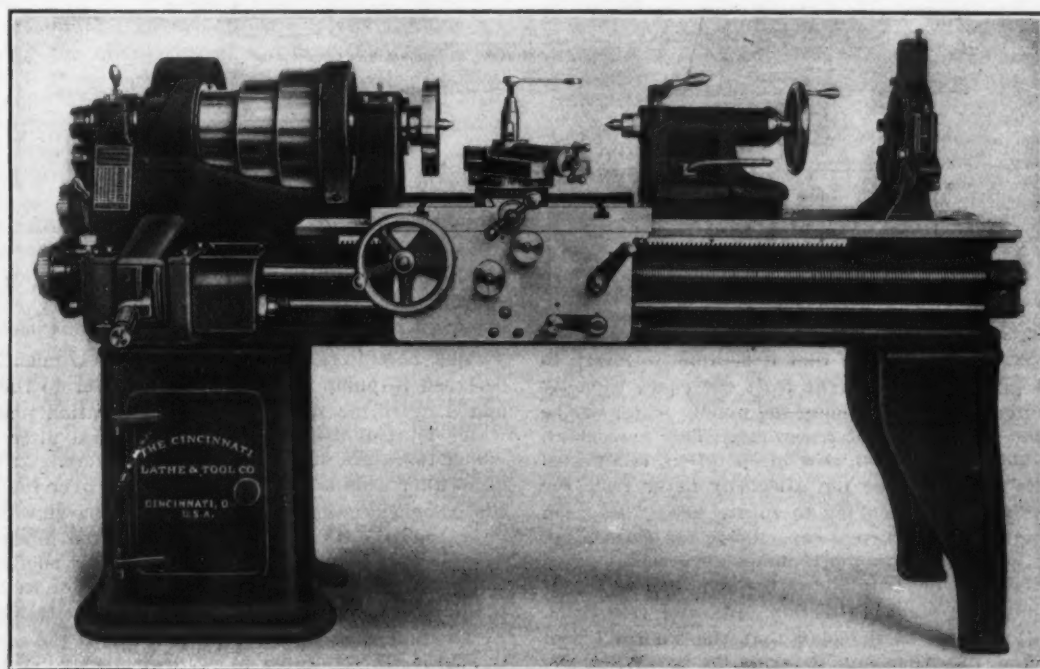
A 16-In. Engine Lathe with the New Positive Feed. Built by the Cincinnati Lathe & Tool Company, Cincinnati, Ohio.
